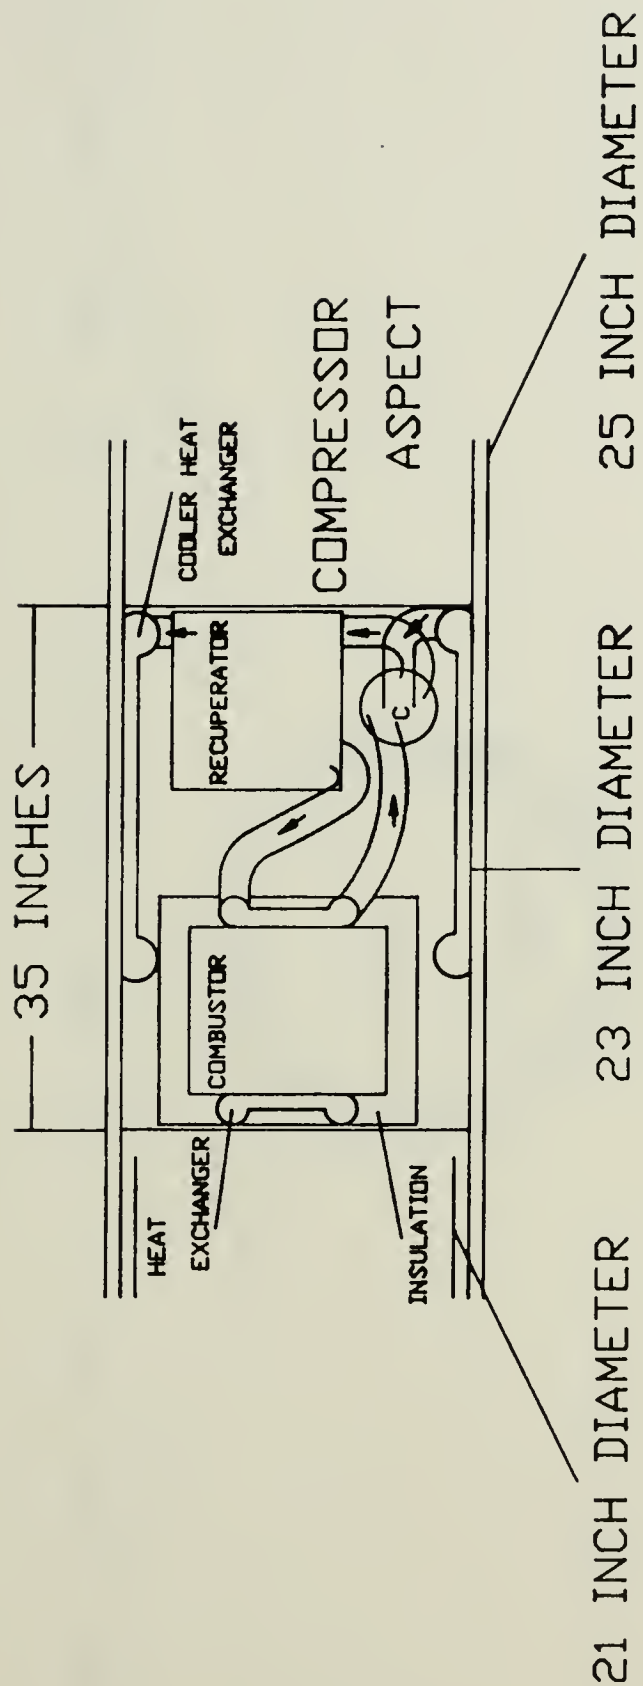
SIDE VIEW OF A 25 INCH DIAMETER VEHICLE
